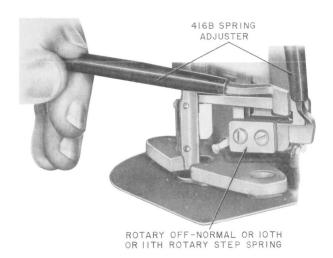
Method of Adjusting U-Shaped Springs on Rotary Off-Normal or Tenth or Eleventh Rotary Step Spring Assemblies
